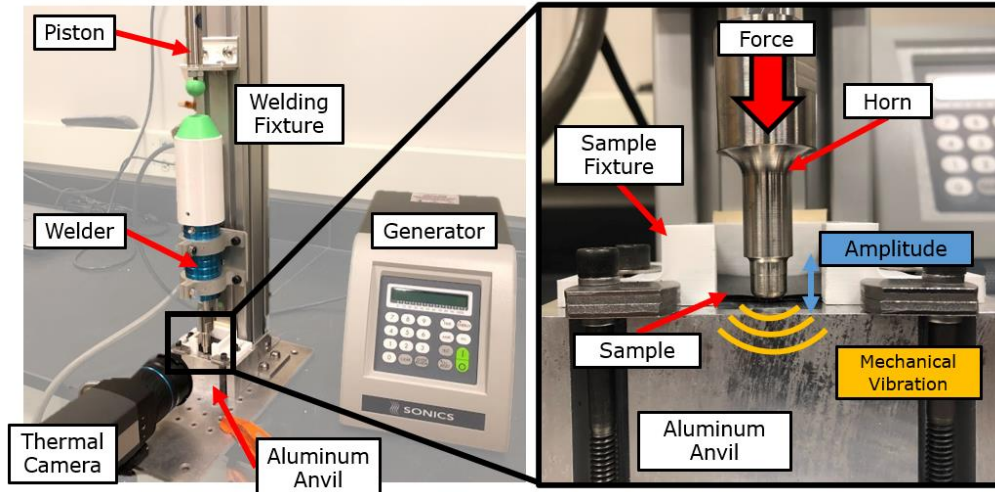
Ultrasonic welding experimental set-up with the thermal camera capturing the thickness plane.
